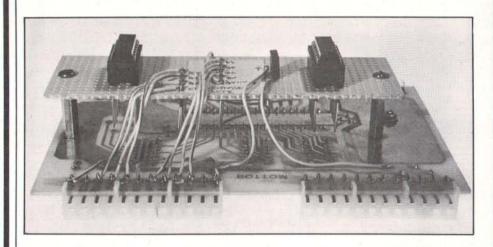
Shown here is the method of mounting the cycle-counter circuit board.
